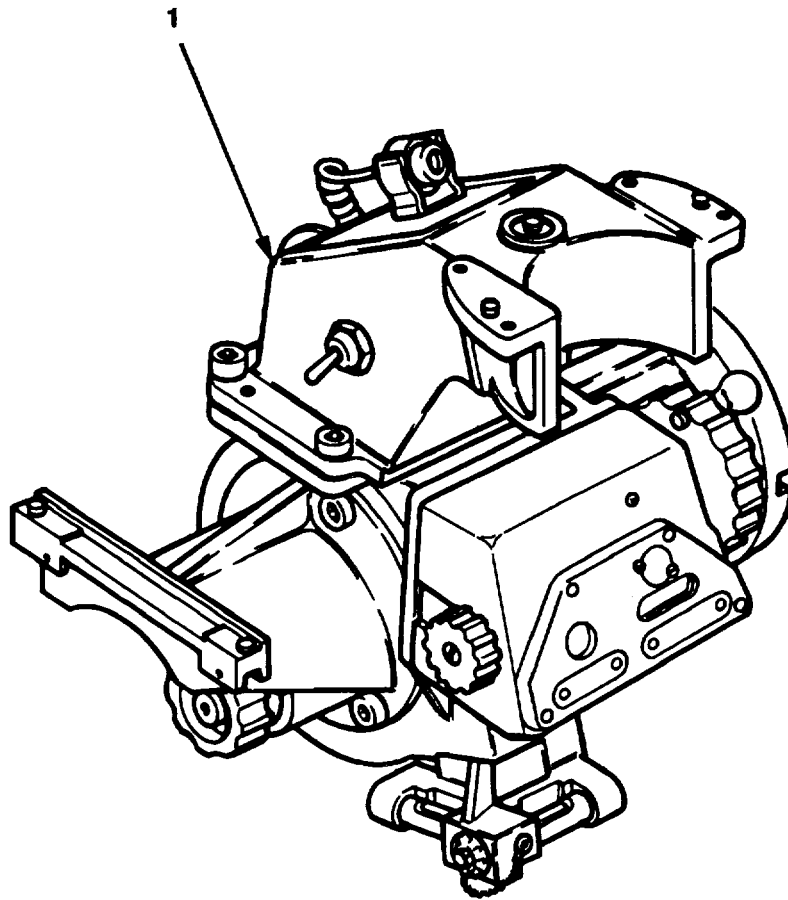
Mount, Telescope, M137 8587295 (Assembled View).
